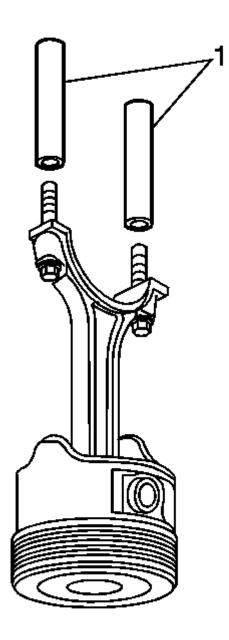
View Of Rubber Fuel Line From Connecting Rod Bolts Courtesy of GENERAL MOTORS CORP.
